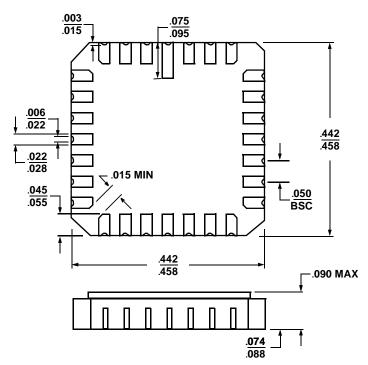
28-Leadless Ceramic Chip Carrier - Package Style L
